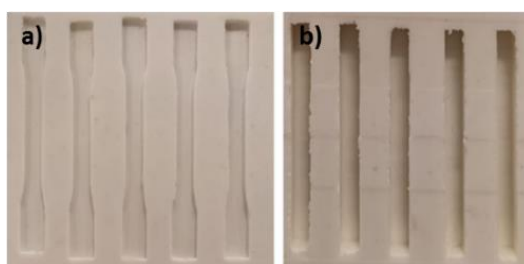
Mold for, (a) Tensile, flexural composite samples and (b) Izod impact composite samples
